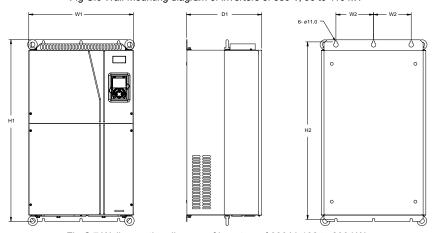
Wall-mounting diagram of inverters of 380 V, 132 to 200 kW
